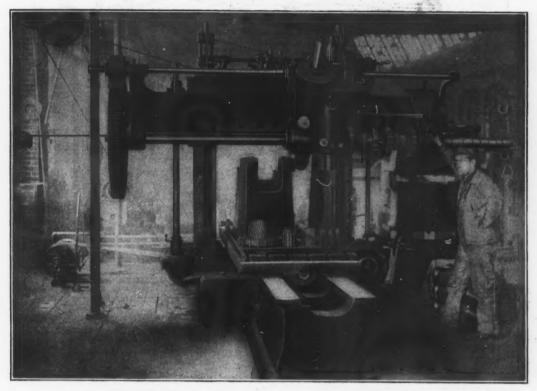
The Ingersoll Special Milling Machine Performing All Finishing on a Gas Engine Bed at One Setting.
